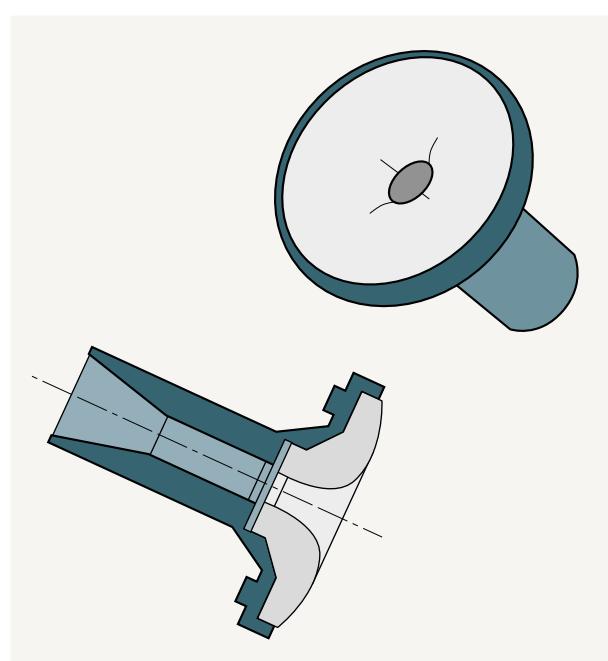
Draw-off nozzles with ceramic nozzle head and metal nozzle holder
